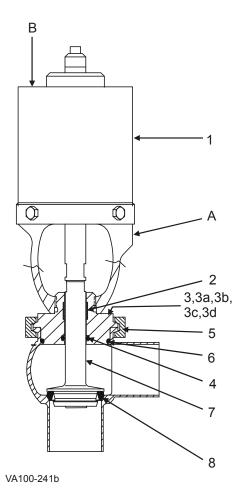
W61/W81 Shut Off Valve (Air-to-Raise Shown)
